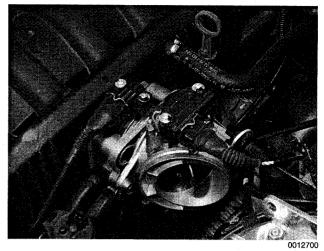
Throttle housing assembly on M52 engine. Disconnect hoses, cables and harness connectors at and around housing.
